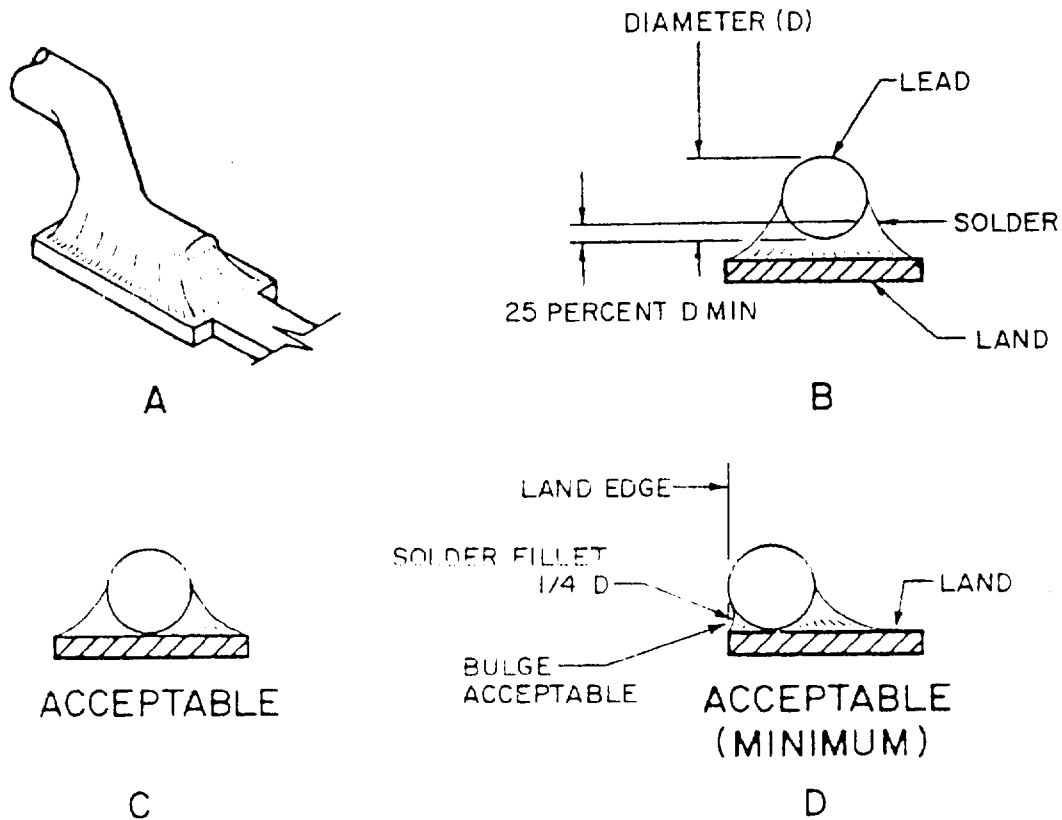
Planar mounted device round or coined lead solder fillet (see 4.19.5.3).
